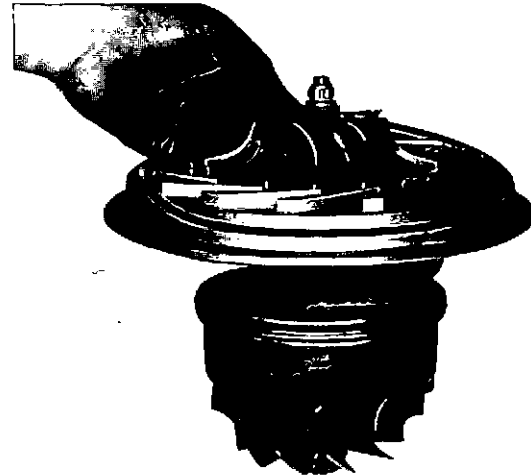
, (TA38). Installing the O-ring on the back plate
